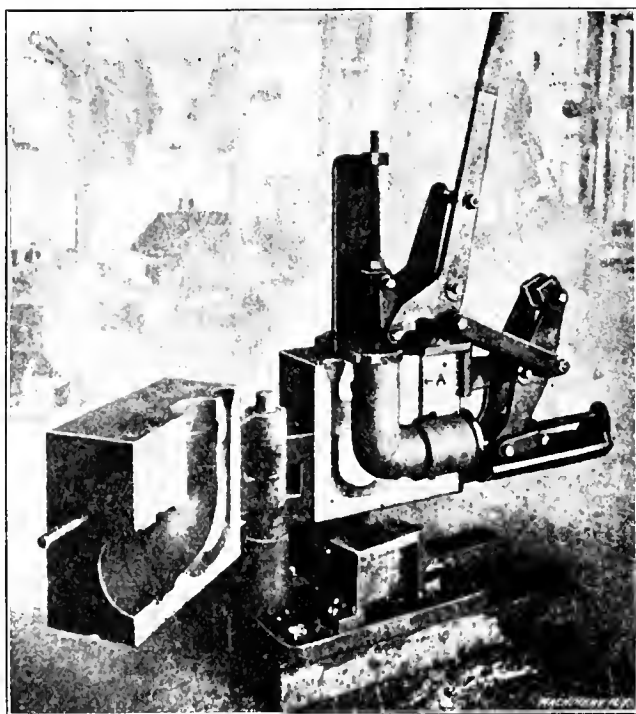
Permanent Mold for 5-inch Quarter Bend showing the Cores in Position for Casting
